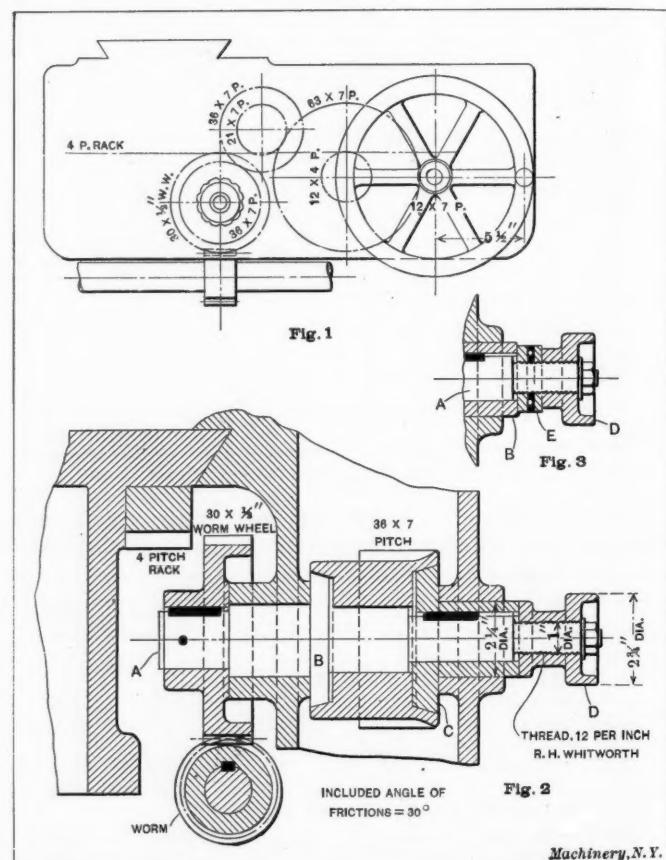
Elevation of Lathe Apron showing Position of Gears for Longitudinal Feed. Fig. 2. Sectional View showing Feed Arrangement. Fig. 3. How Thrust-bearing was applied
